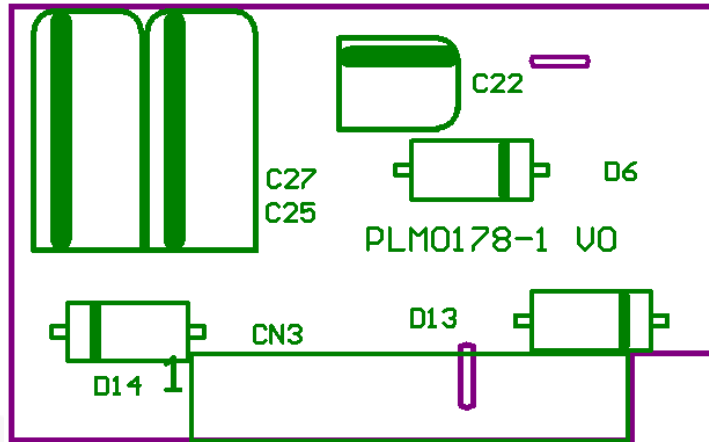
Evaluation Board Layout (Daughter Card), Top Overlay
